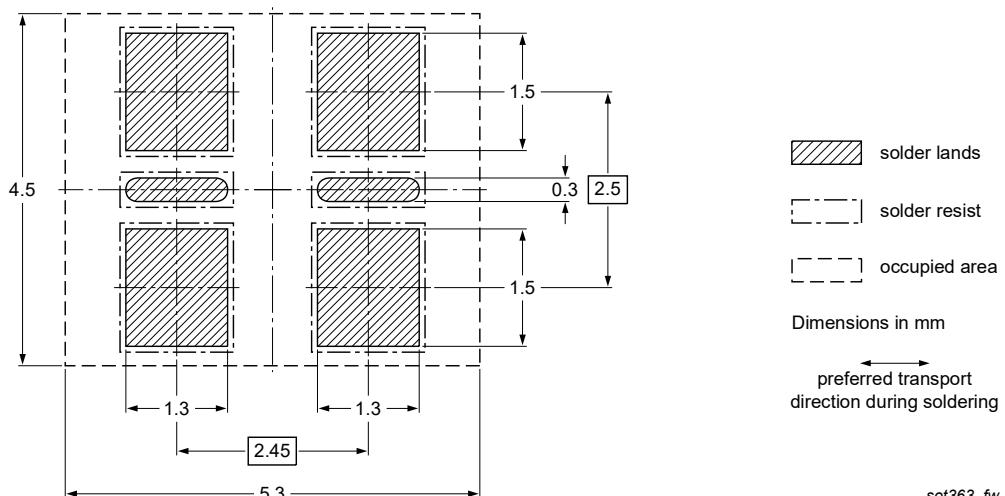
Wave soldering footprint for TSSOP6 (SOT363)
